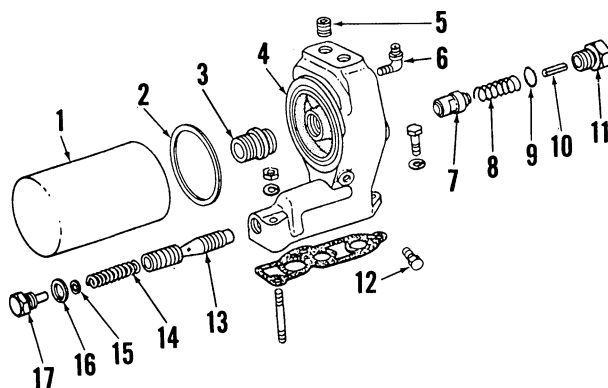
Exploded view of oil filter housing and associated parts showing pressure regulating valve and oil filter bypass valve. Fitting (6) is not used on Model 4050.
